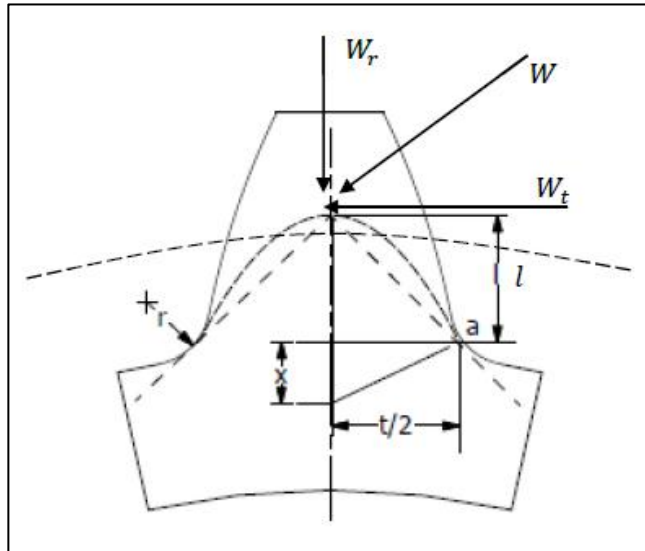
Loads and length dimensions used for determining the tooth bending stress.
